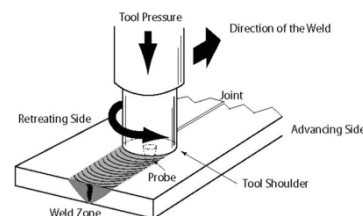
Shows metal plates butted together with probe and tool shoulder of FSW process
